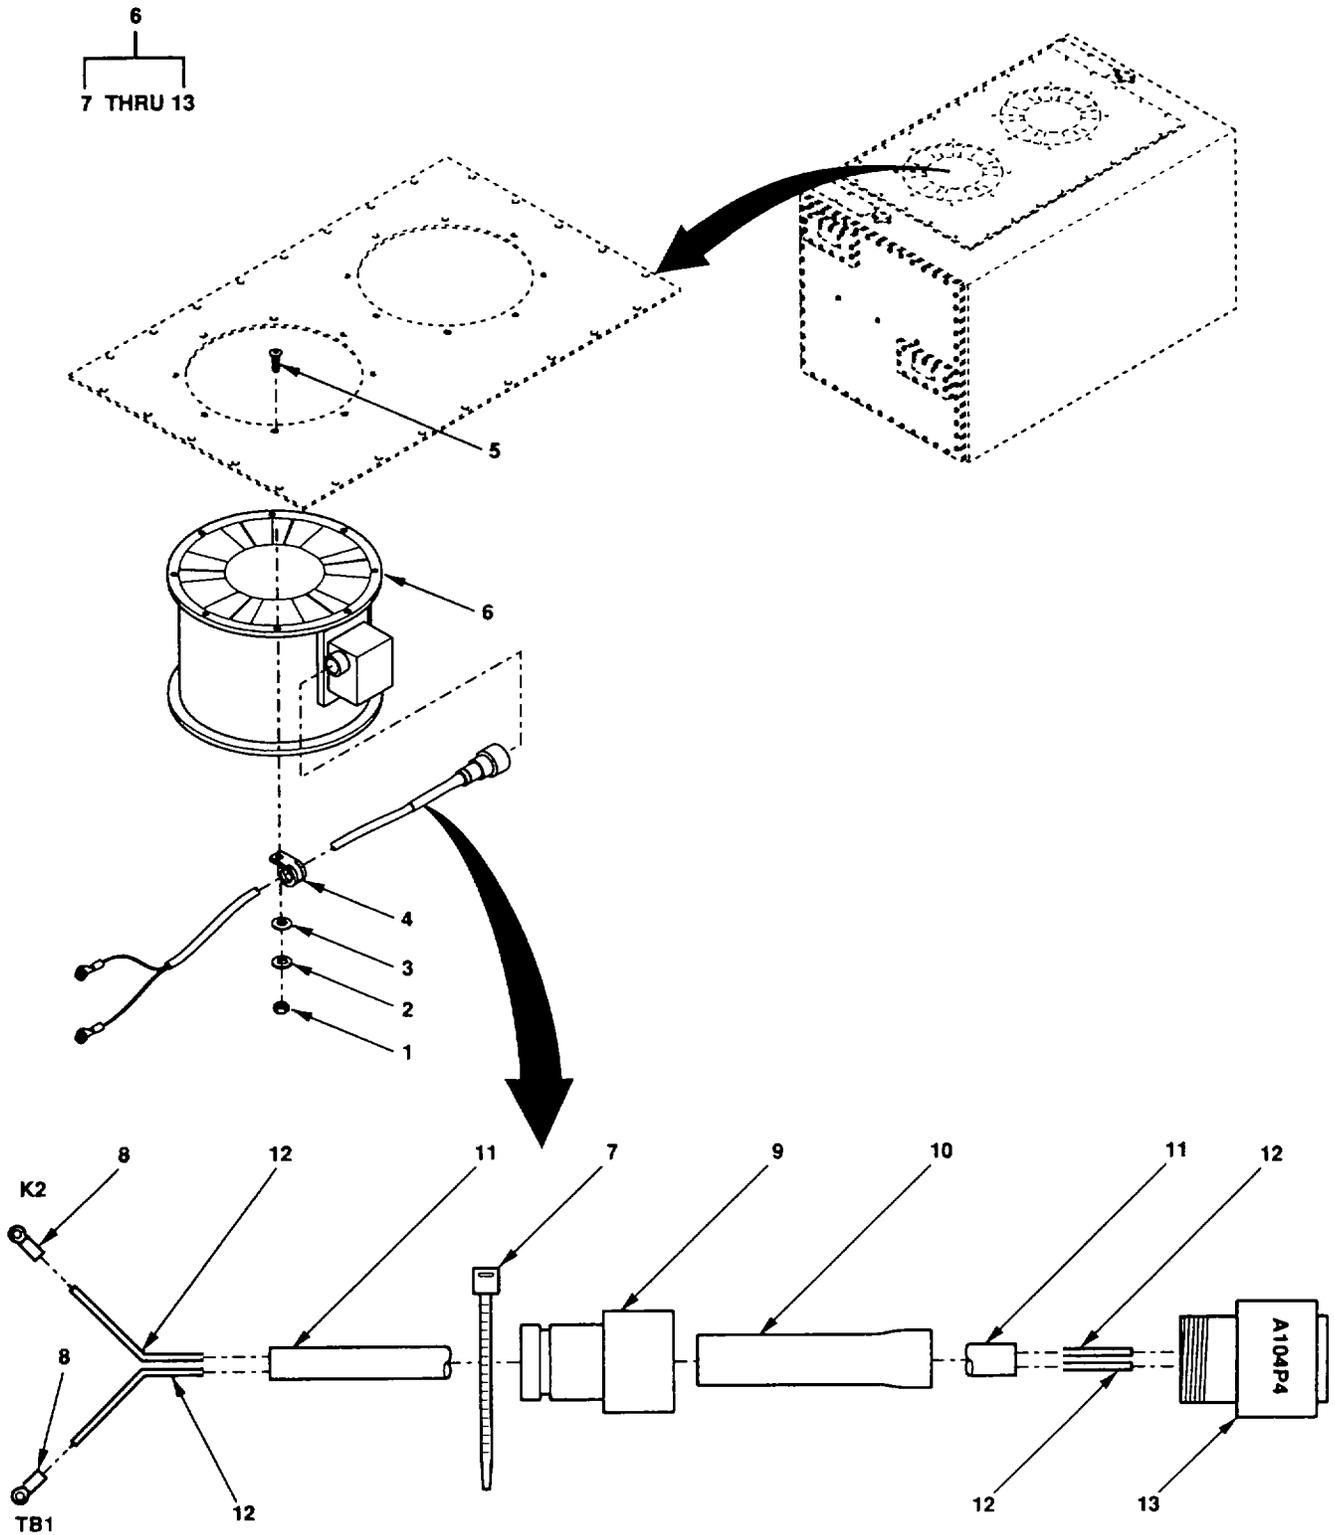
Driver-Side Condenser Vane Axial Fan and Wiring Harness (A104P4)
